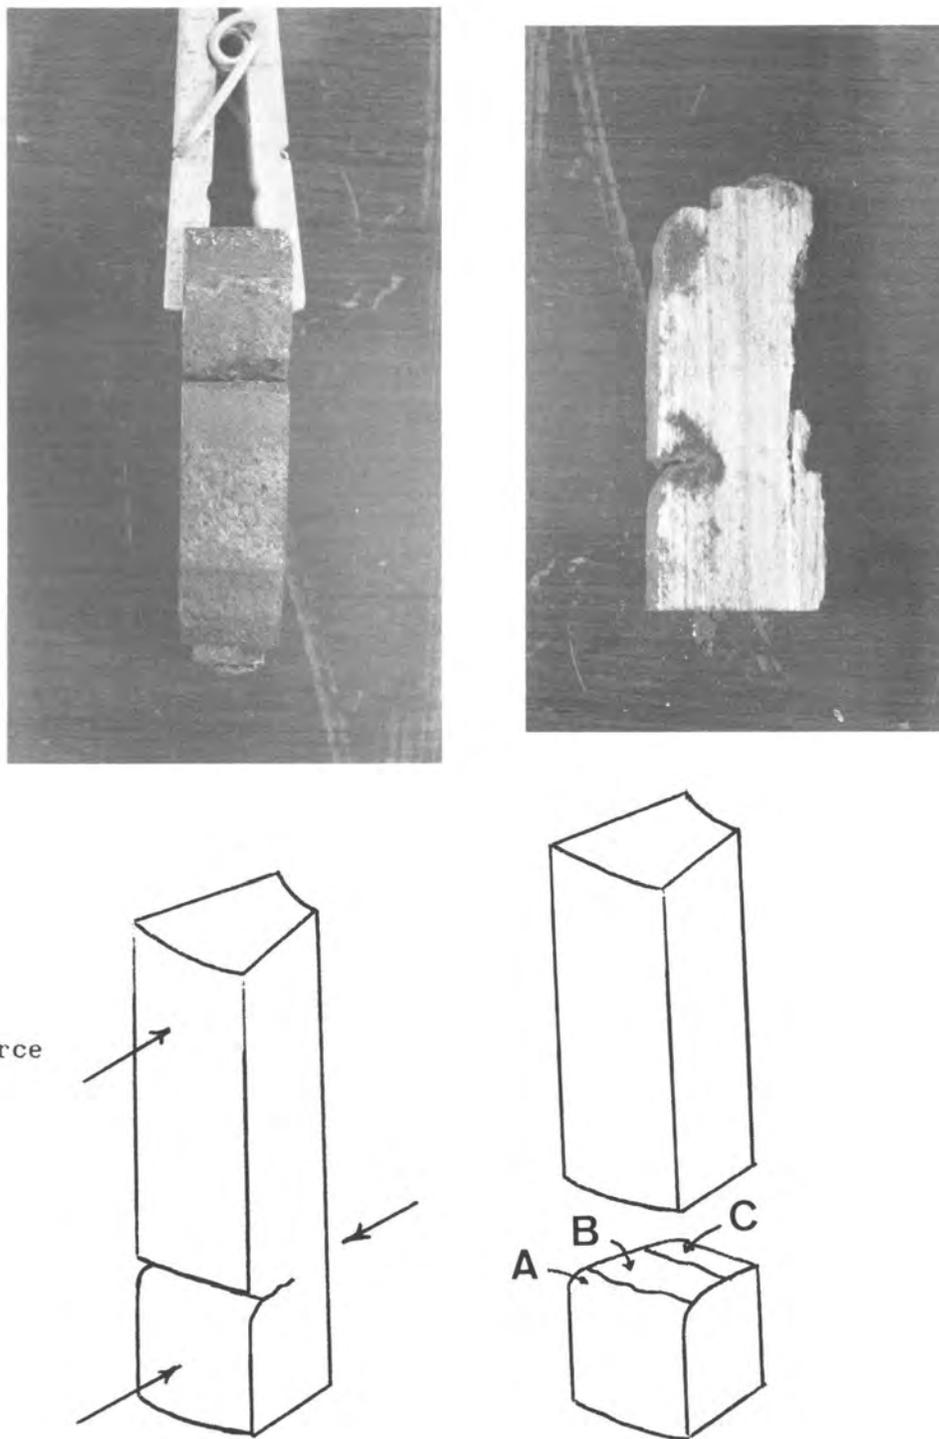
One of the wedge shaped samples cut from the full pin was fractured, revealing a surface composed of part corrosion pit (a), part corrosion surface that was a part of the crack (b), and a fresh fracture surface (c).
